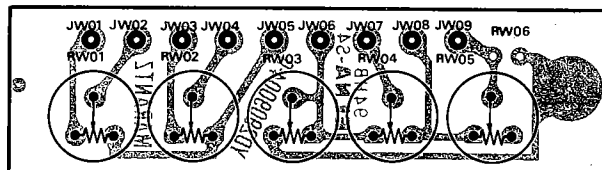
Trimming Resistor Assembly PW01 Component Locations
